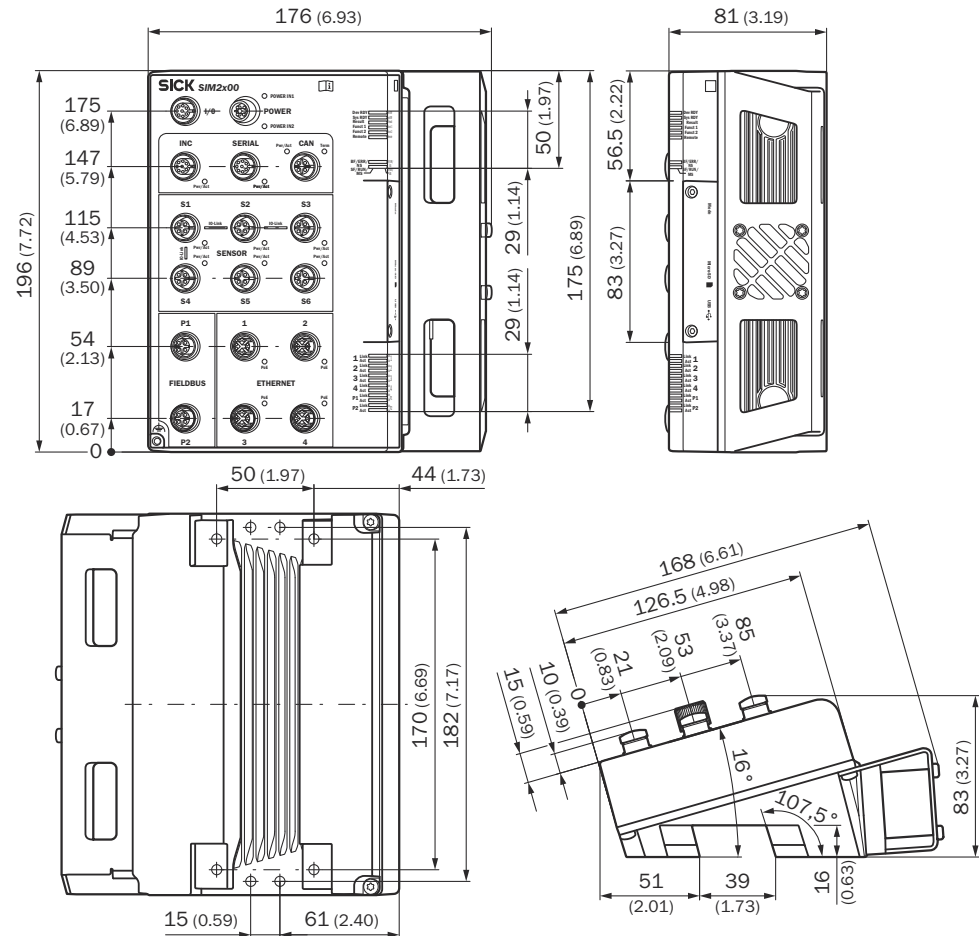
Device dimensions, unit: mm (inch), decimal separator: period
